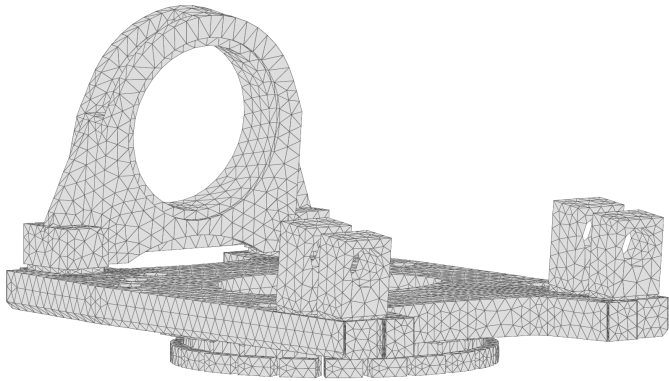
FE model of the bedplate with yaw clamps, main bearing housing and gearbox supports.
